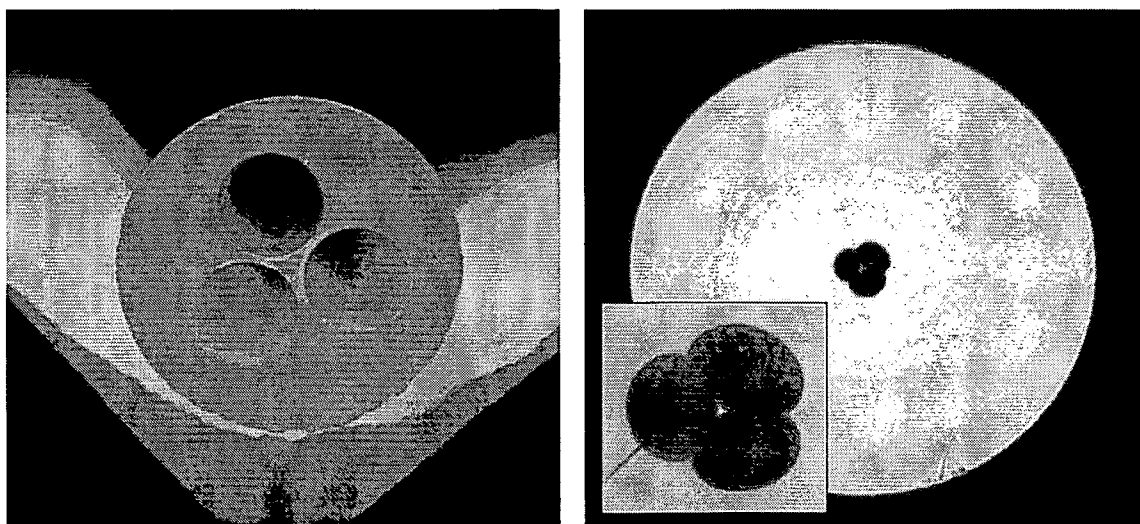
Fabrication of a suspended core (SC) Holey Fibre: drilled preform (left); final drawn fibre (right)
